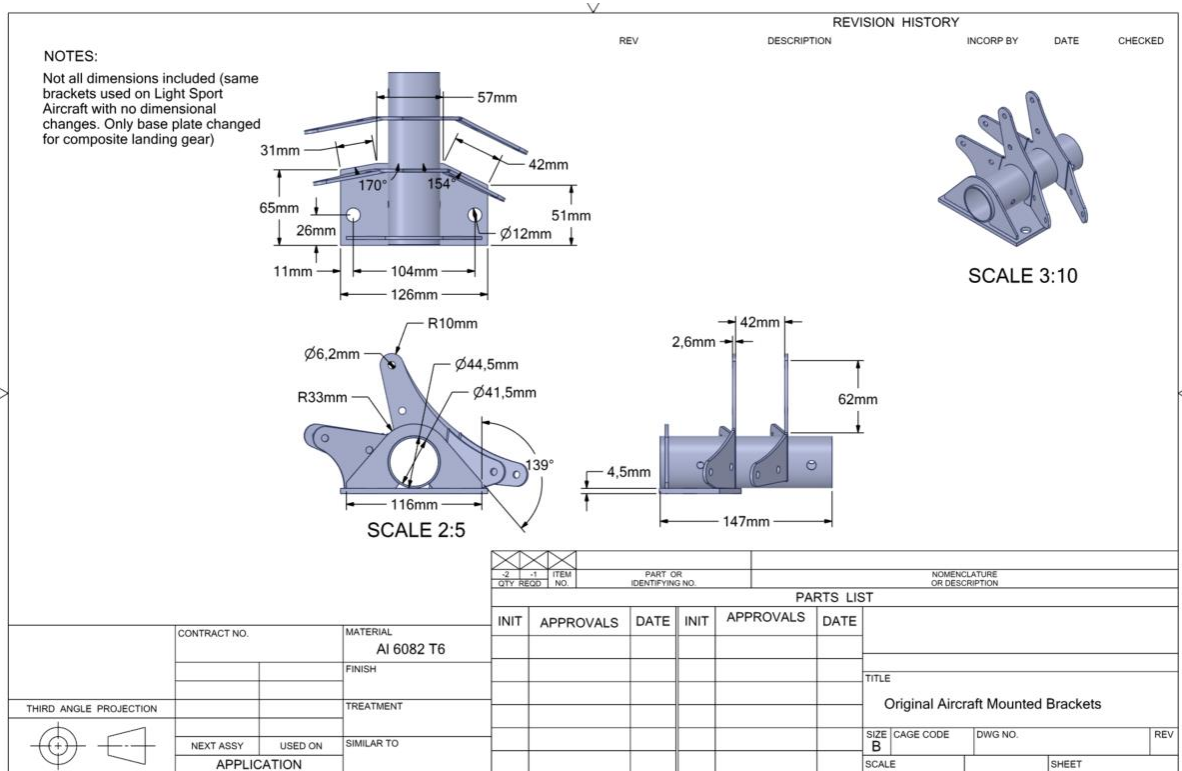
Aluminium 6082 T6 Aircraft Mounted Brackets Drawing
